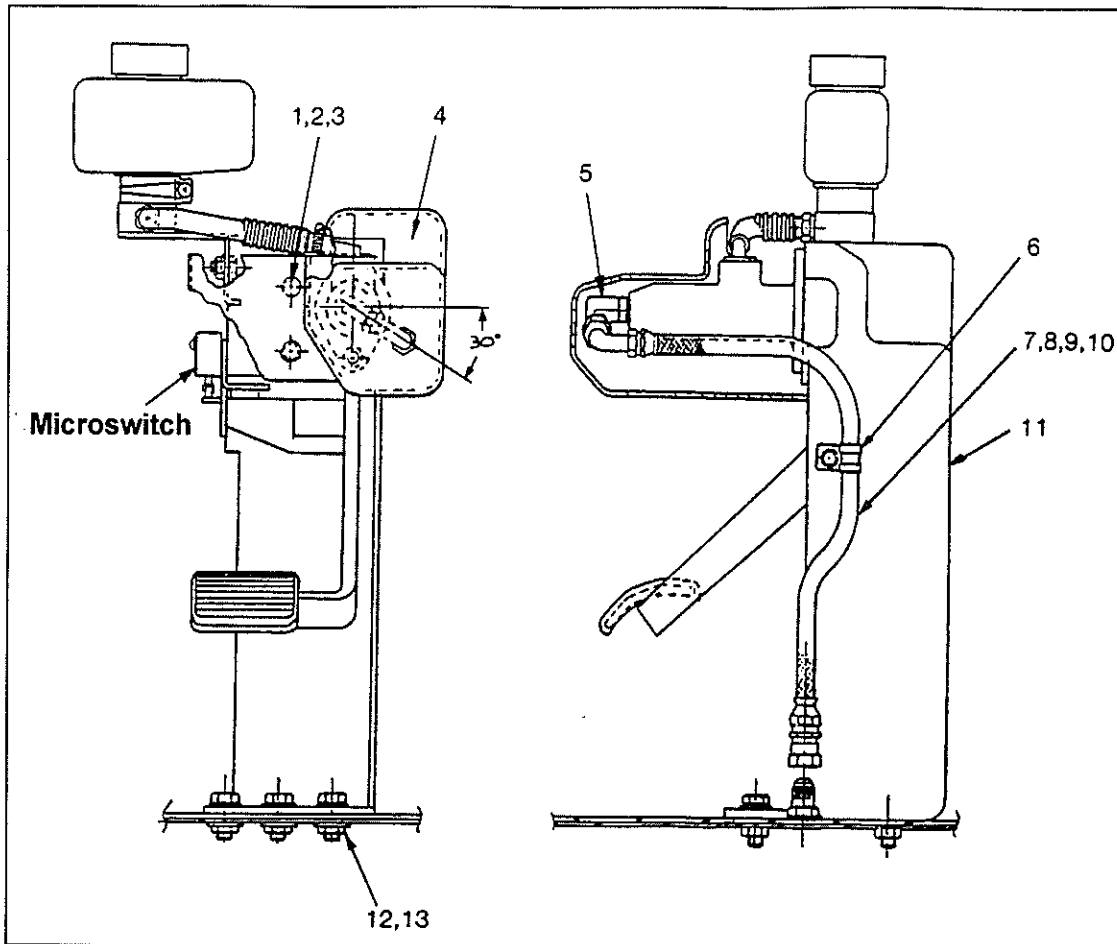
CLUTCH PEDAL ASSEMBLY INSTALLATION
